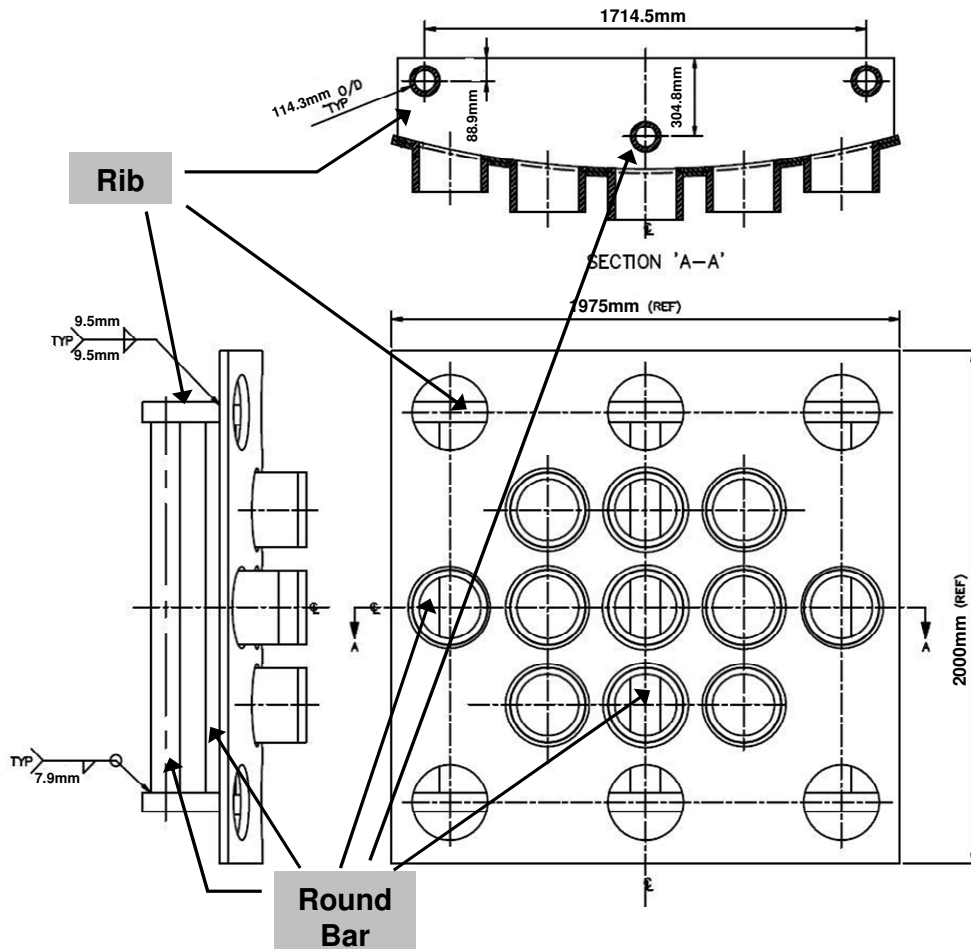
Multi-nozzle Weld Mockup with Rib-Bar Fixture
